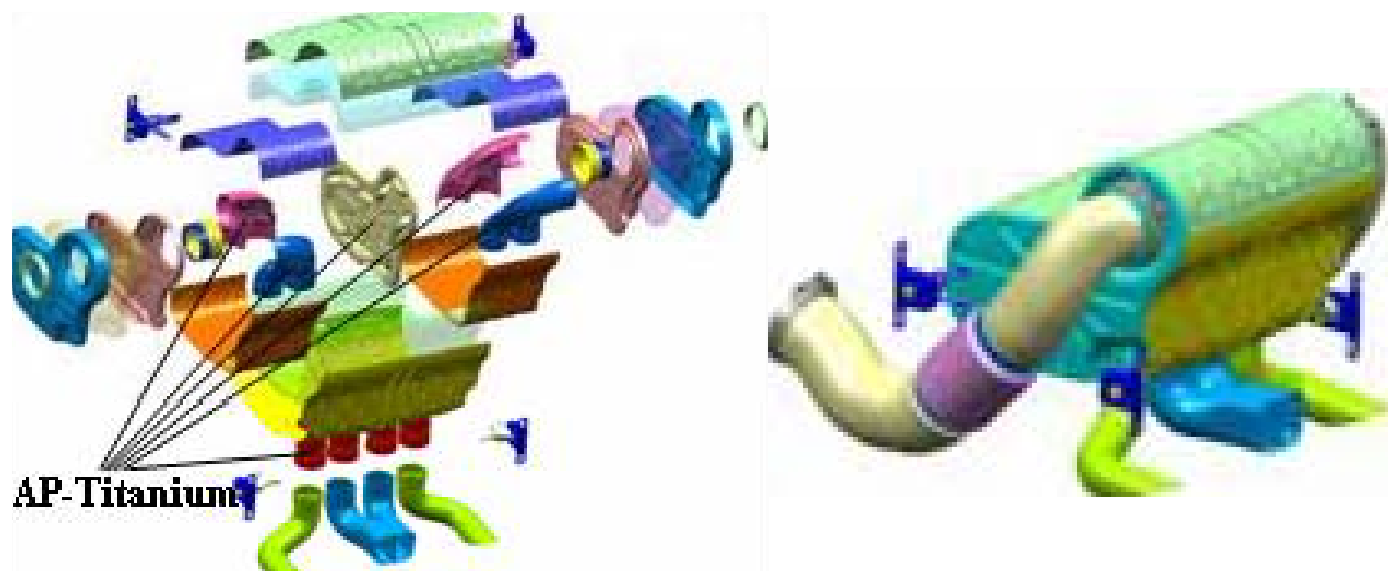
Exploded view of Al-Plated (AP) cp-Ti components in the rear muffler of the Bugatti Veyron
